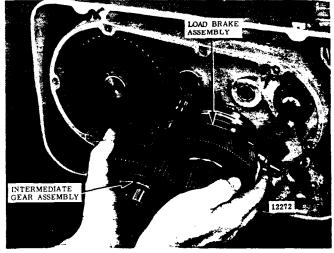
Removing Load Brake and Intermediate Gear Assemblies.
